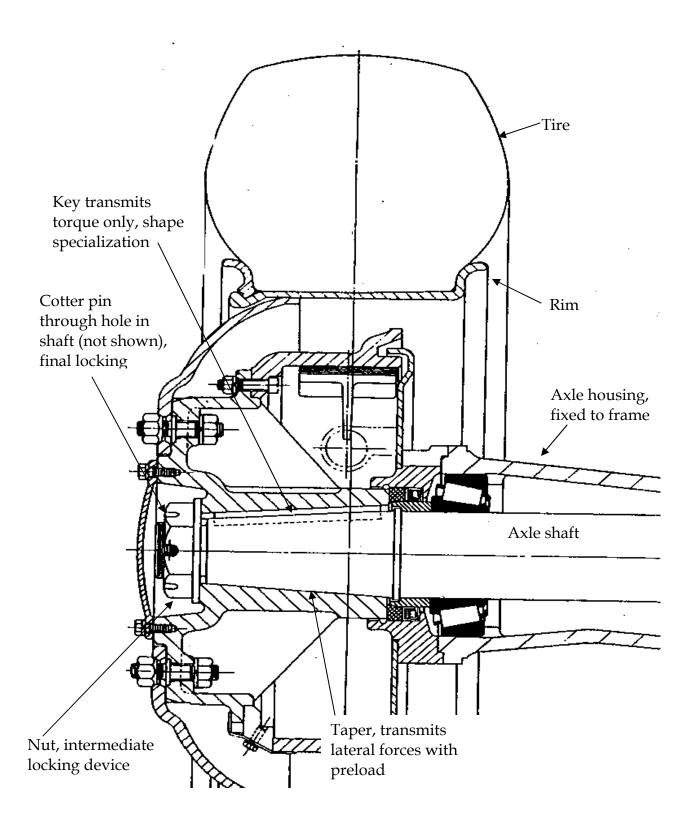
Wheel mounted on a tapered axle shaft with a key, held on by a castellated nut, and a Cotter Pin (not shown).
